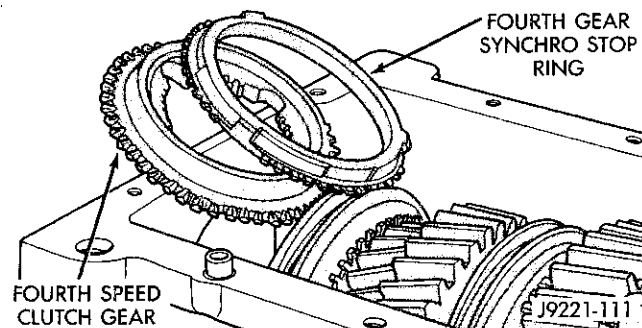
Fourth Speed Clutch Gear Stop Ring Removal
